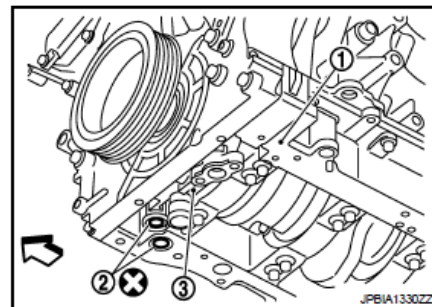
Identifying Lower Cylinder Block And Oil Pump
